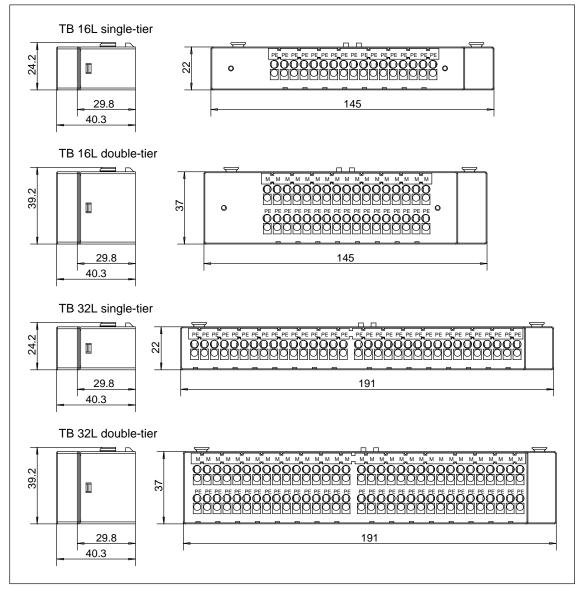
TB 16L/TB 32L Supplementary Terminals, Dimension Drawing
